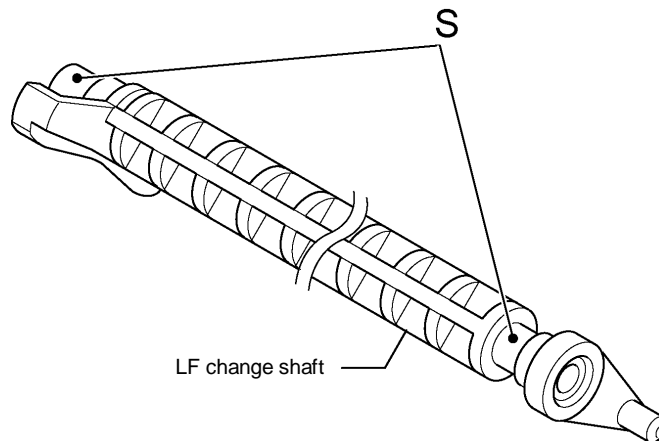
Engaged Parts of LF Change Shaft
